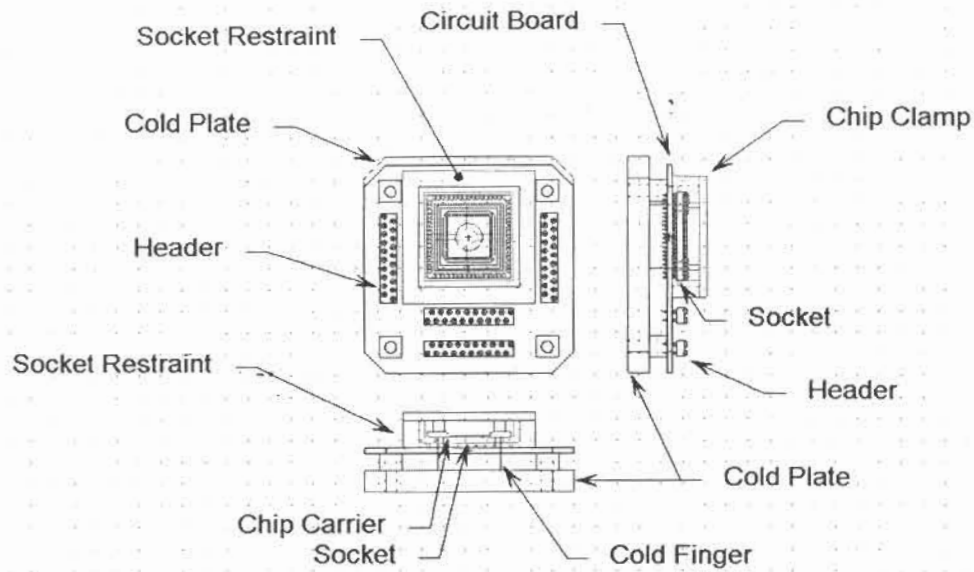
64-pin LLCC socket assembly and cold finger for mounting the detectors into the LN2 dewar.
